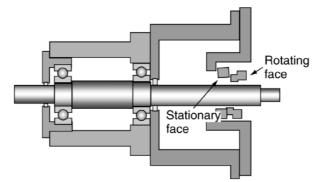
Notice the Effect of Non-Concentricity of Seal Housing on Seal Faces – Exaggerated View
